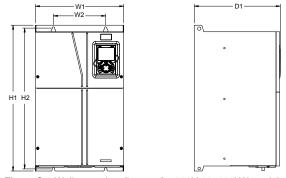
Wall-mounting diagram for 380V 90-110kW models
